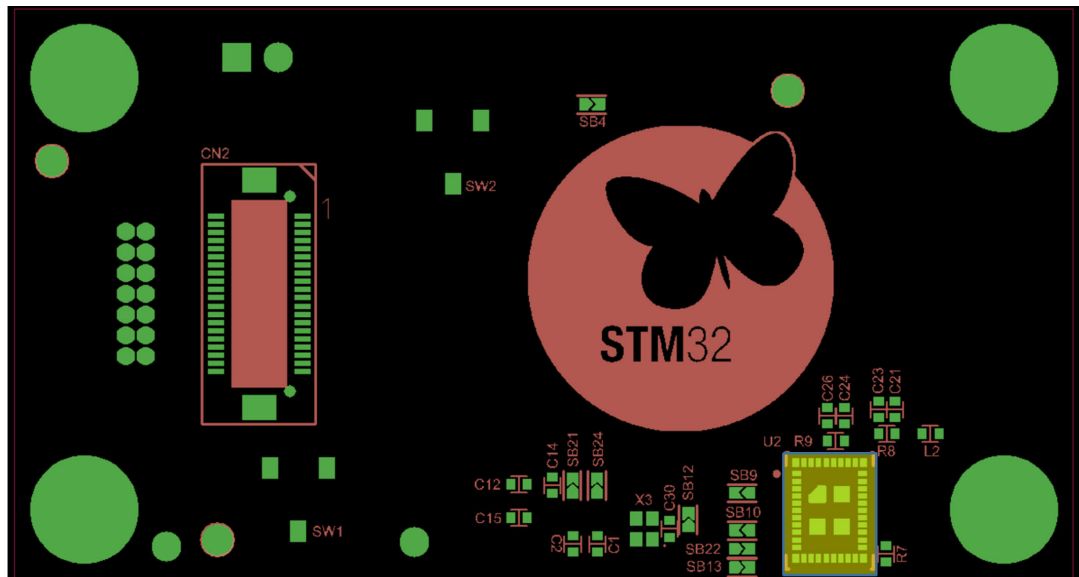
STEVAL-VUIMB02V1 layout (bottom view)
